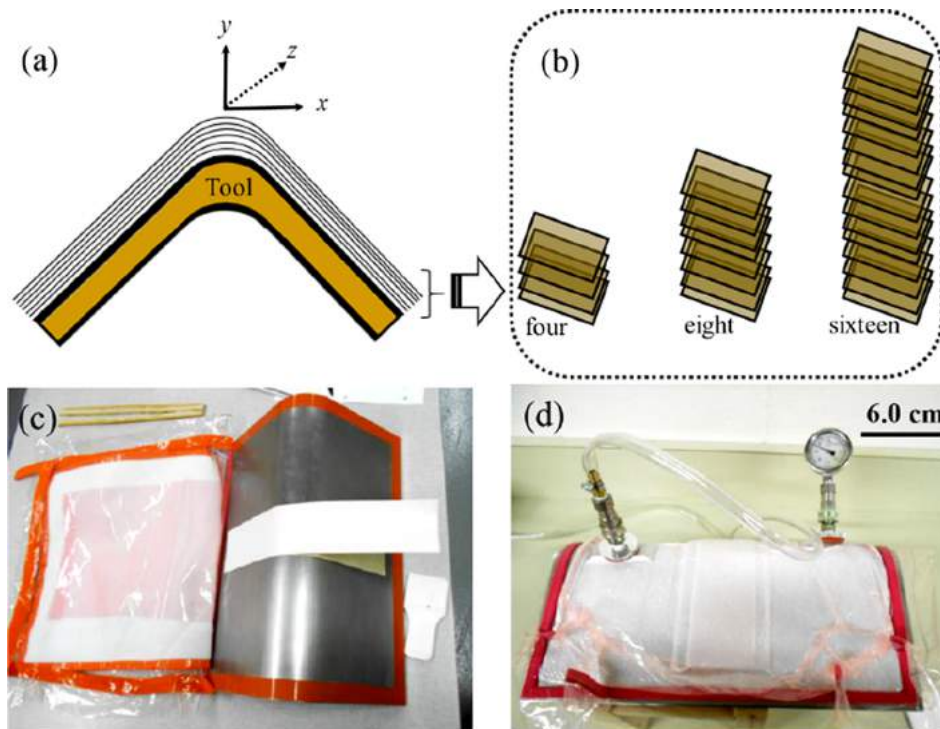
(a) An L-shaped, low carbon stainless steel tool. (b) The three configurations using four plies, eight plies and sixteen plies. (c) Prepreg layup on the mold. (d) Bagging and vacuum setup. (For interpretation of the references to color in this figure legend, the reader is referred to the web version of this article.)
